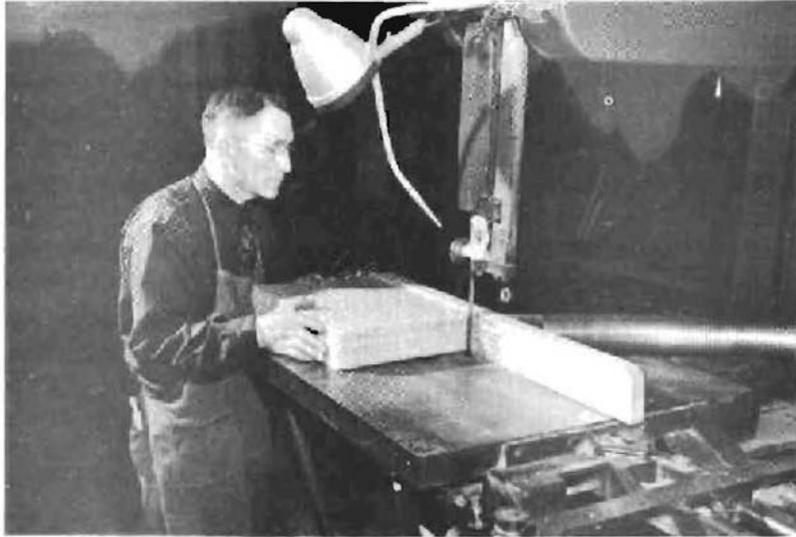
Band saw set-up used for cutting glass cloth honeycomb.
